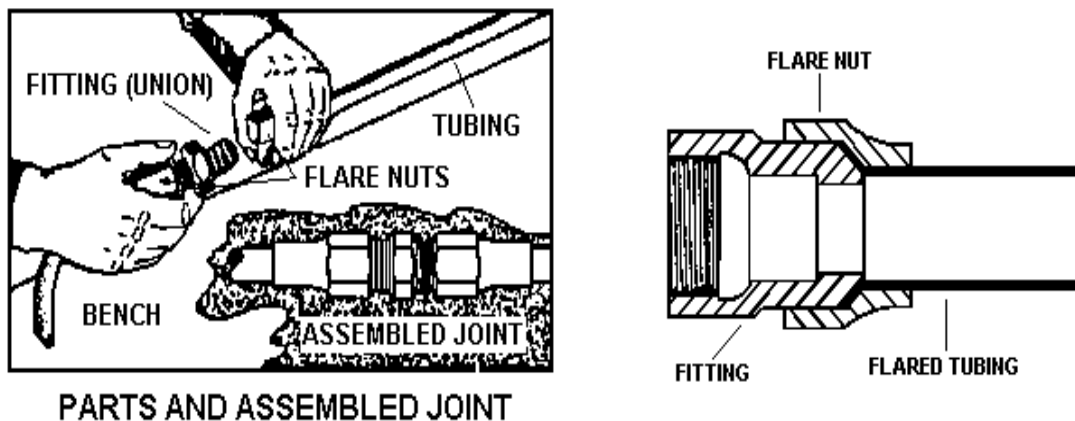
, Parts and Assembled Joint Figure 15, Copper Fitting
